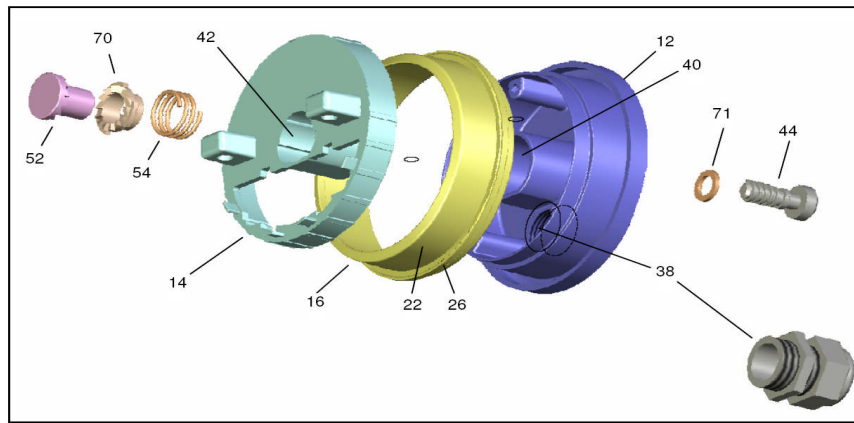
CAD exploded view of an embodiment of the tension lock system on the face side with a well-defined torque cut off point
